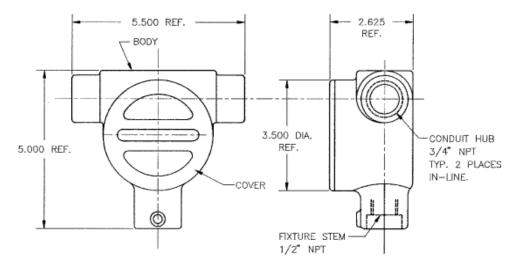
Optional Explosion Proof Mounting Box, P/N 06-116317-001
